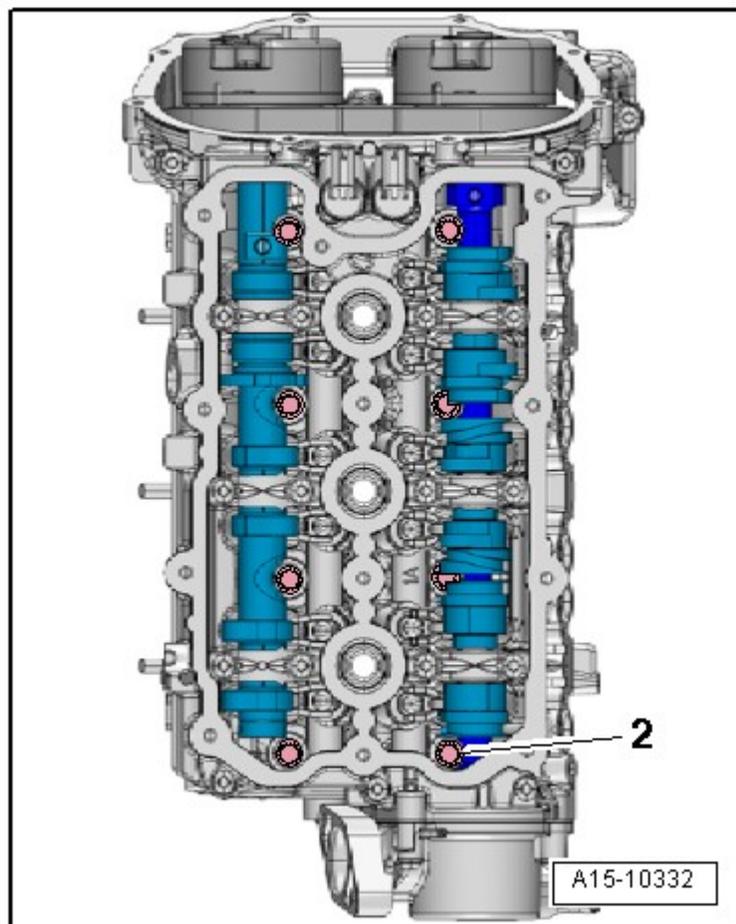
Identifying Bolt (Left Cylinder Head)
